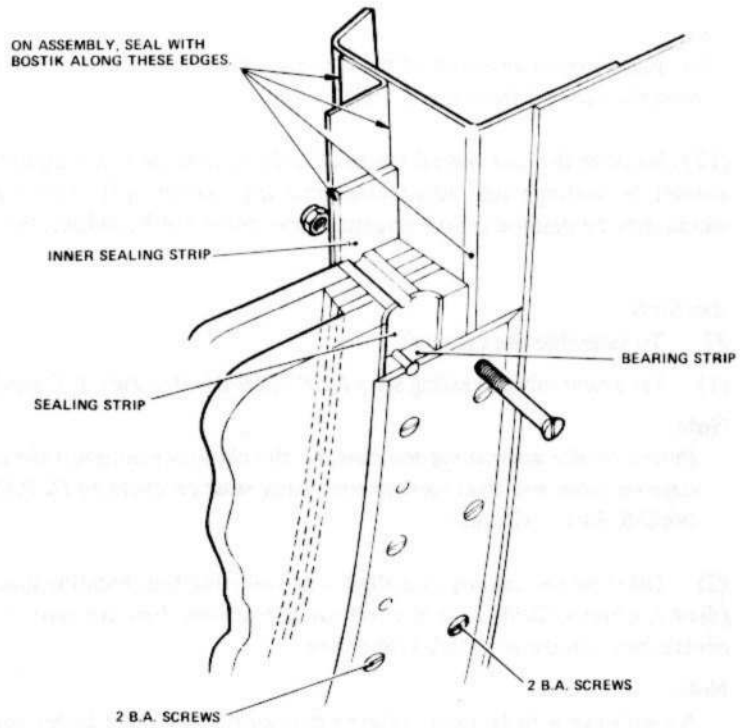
NOSE FAIRING - REMOVAL AND ASSEMBLY
